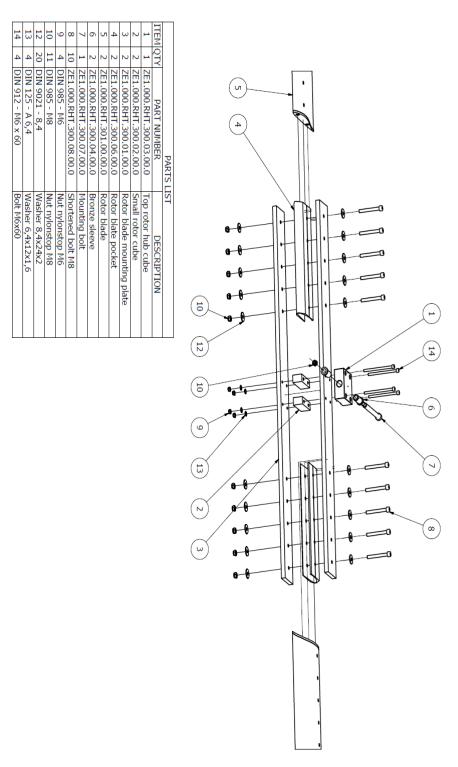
Assembly of the rotor hub (Note: After assembly, the rotor hub cannot be disassembled) (Use WHS2000 to lubricate Mounting bolt – Item 7 from figure 3.1-1)
